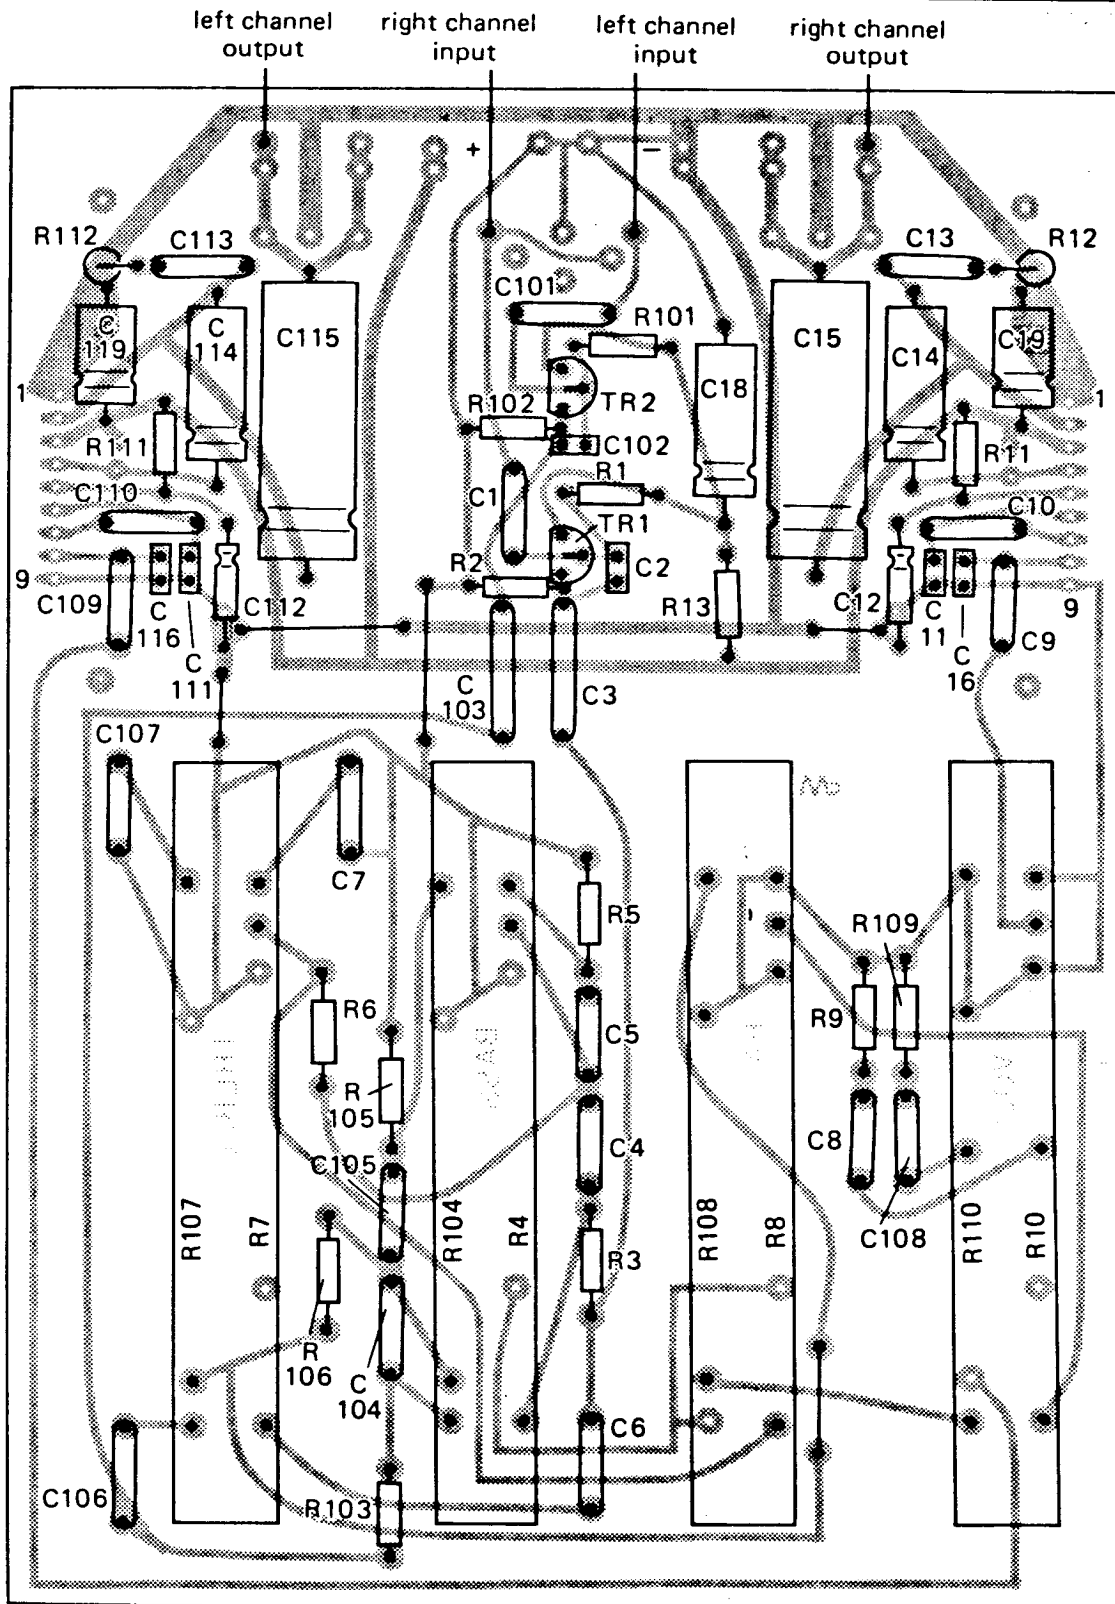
Component side of printed-circuit board showing component layout used for the circuit of Fig. 17 (Fig. 16 partly).
